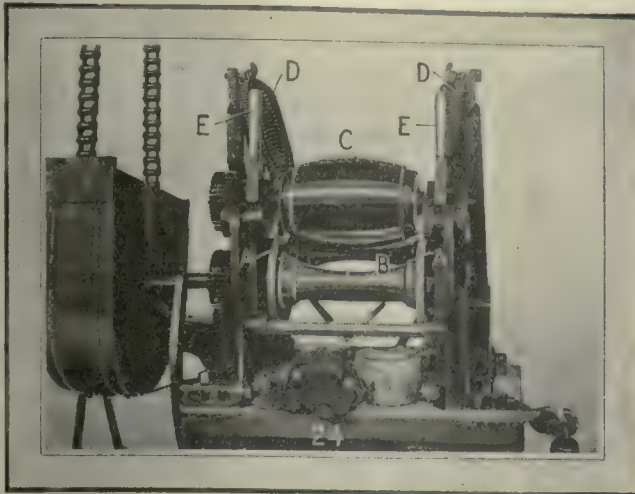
MACHINE FOR ROLLING MUDGUARDS
